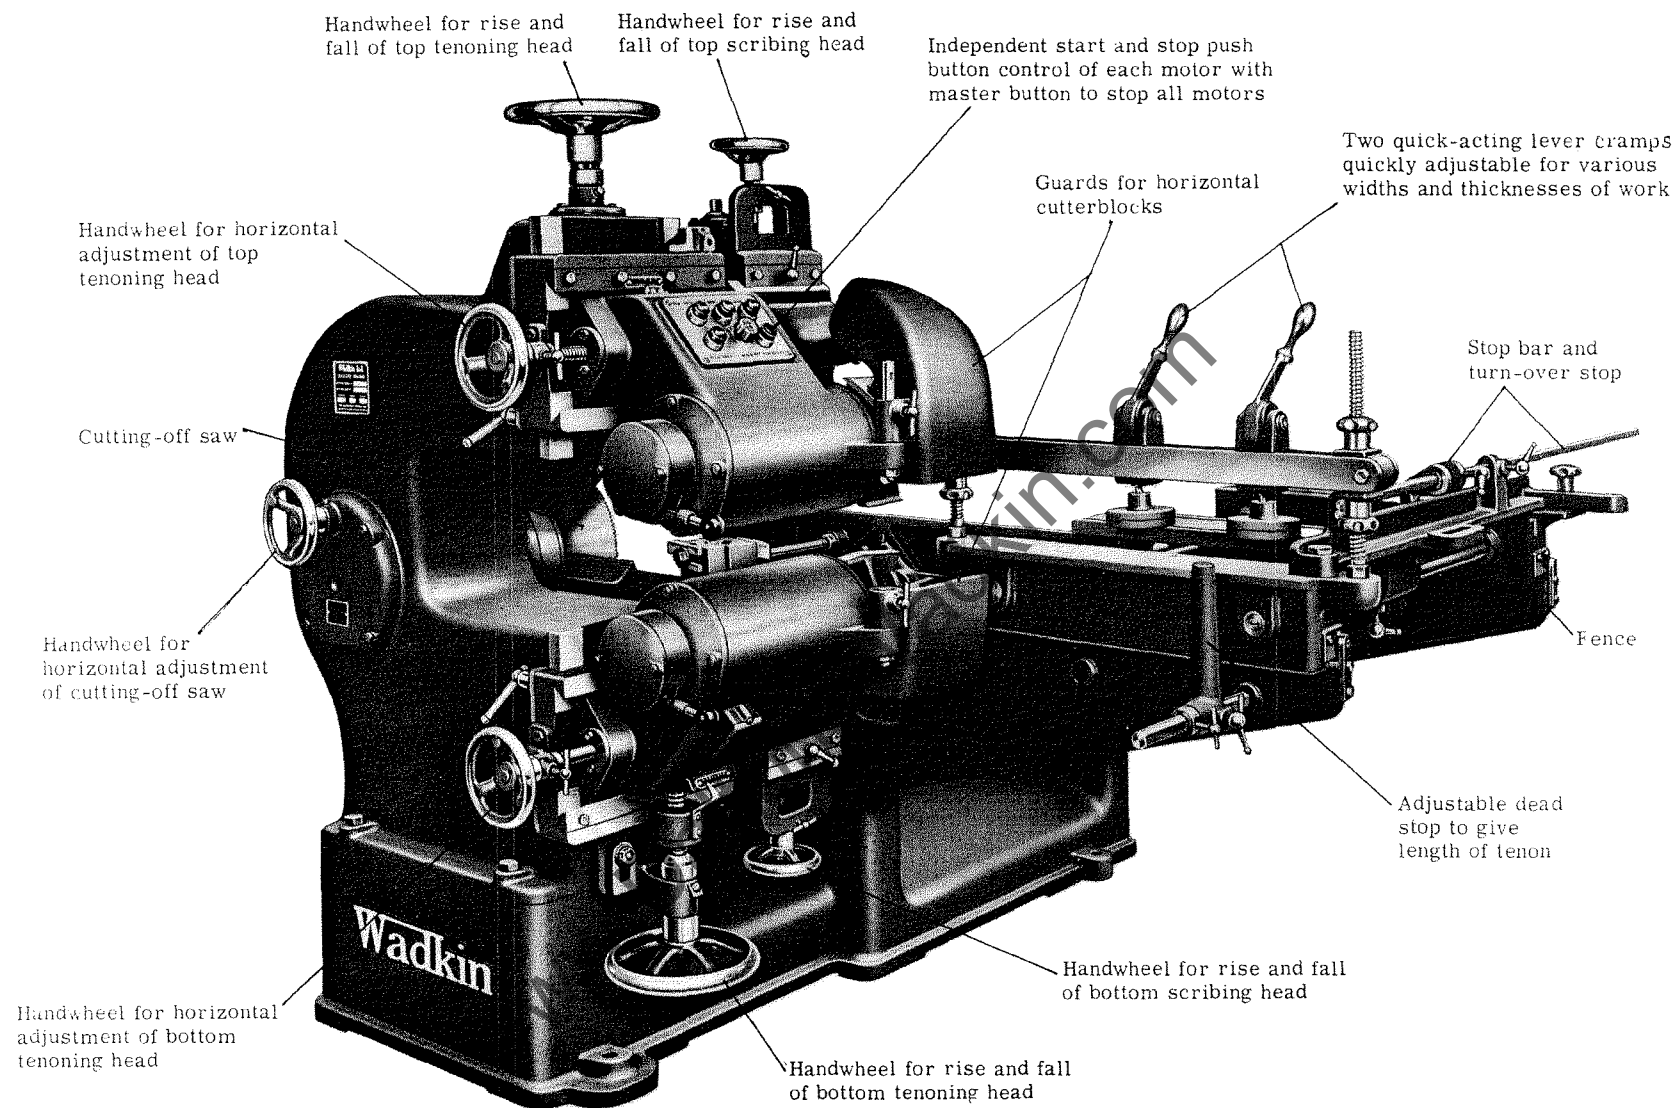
GENERAL VIEW OF SINGLE END TENONER TYPE E. K. A.
